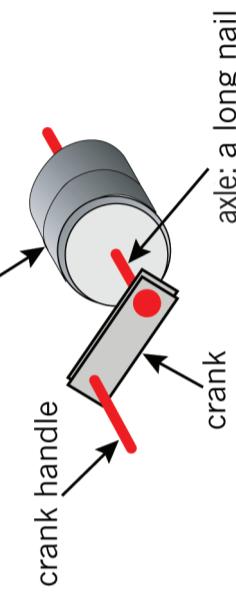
You can make a hand-driven winch drum by joining two milk-bottle tops together.
